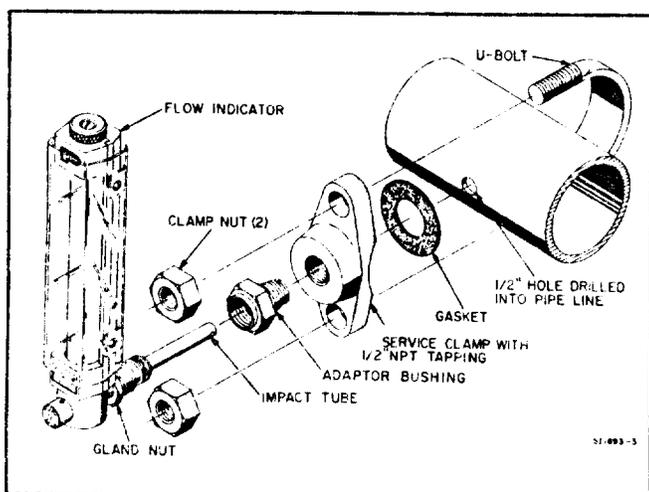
METHOD OF MOUNTING WITH SERVICE CLAMP
